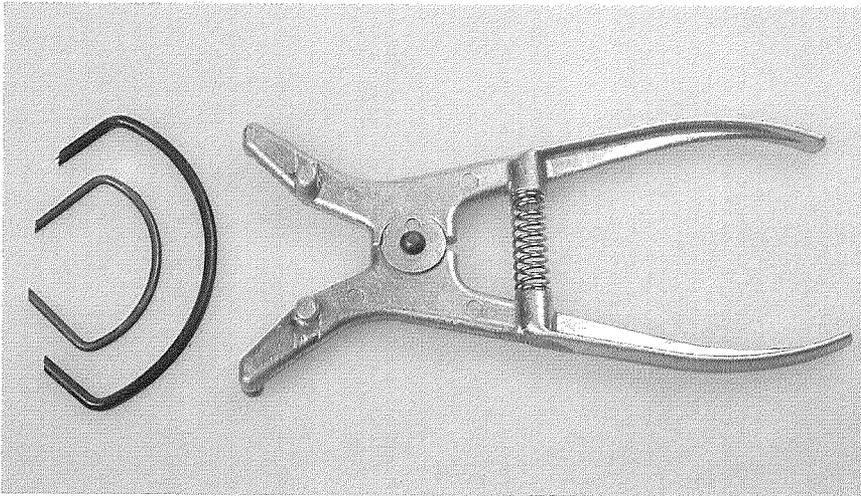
Spring steel corner clamps with the tool used to set them in place.
